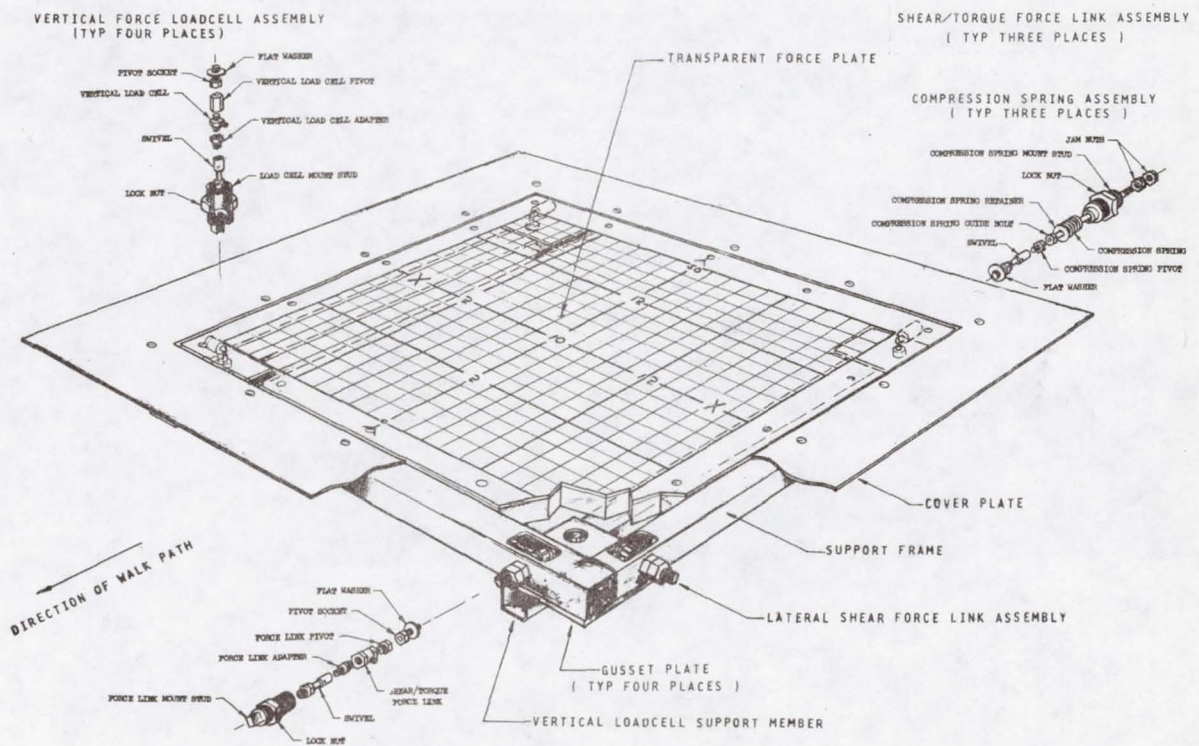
Cut-Away Perspective Drawing of the Dynamic Force Plate
